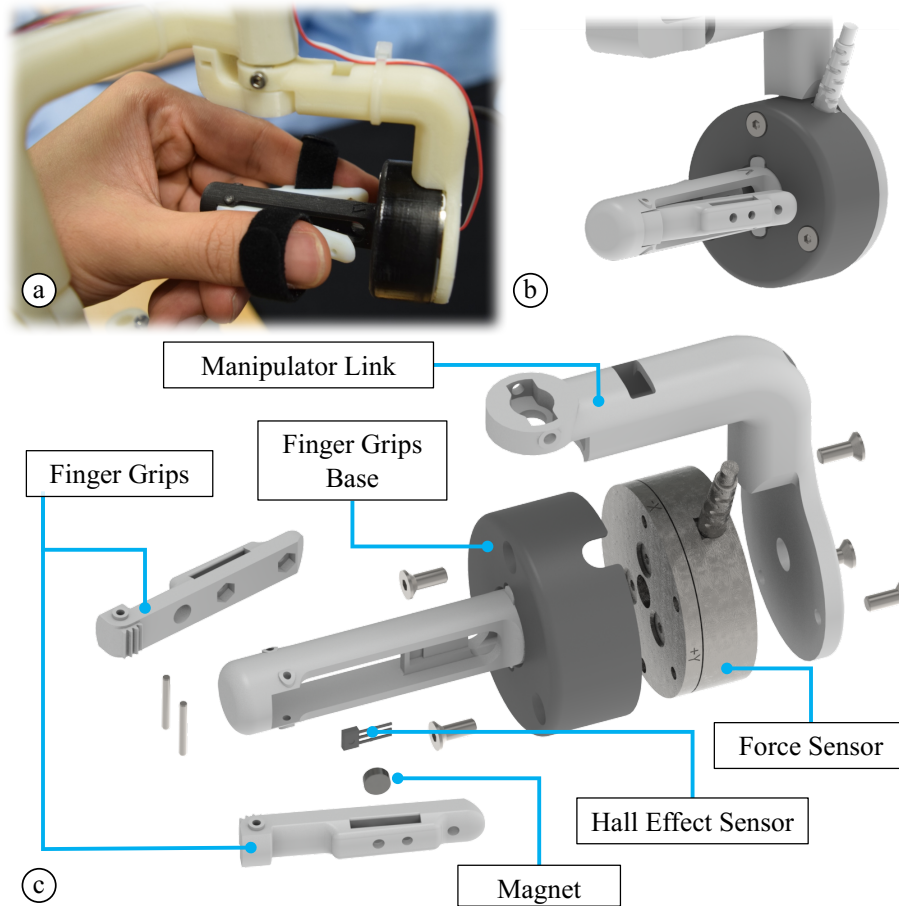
Master manipulator's finger grips design; (a) operator while manipulating the finger grips, (b) CAD rendering of the finger grips, and (c) exploded view presenting the magnet and the Hall effect sensor for position sensing and the integrated force sensor to facilitate the manipulator's motion.
